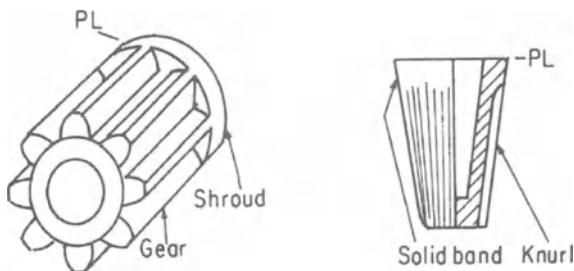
Allowing a parting line flash in gear teeth and on knurled parts requires expensive deflashing operations. To prevent flash, add a shroud to the gear or solid band or bead to the knurl at the mold parting line.
